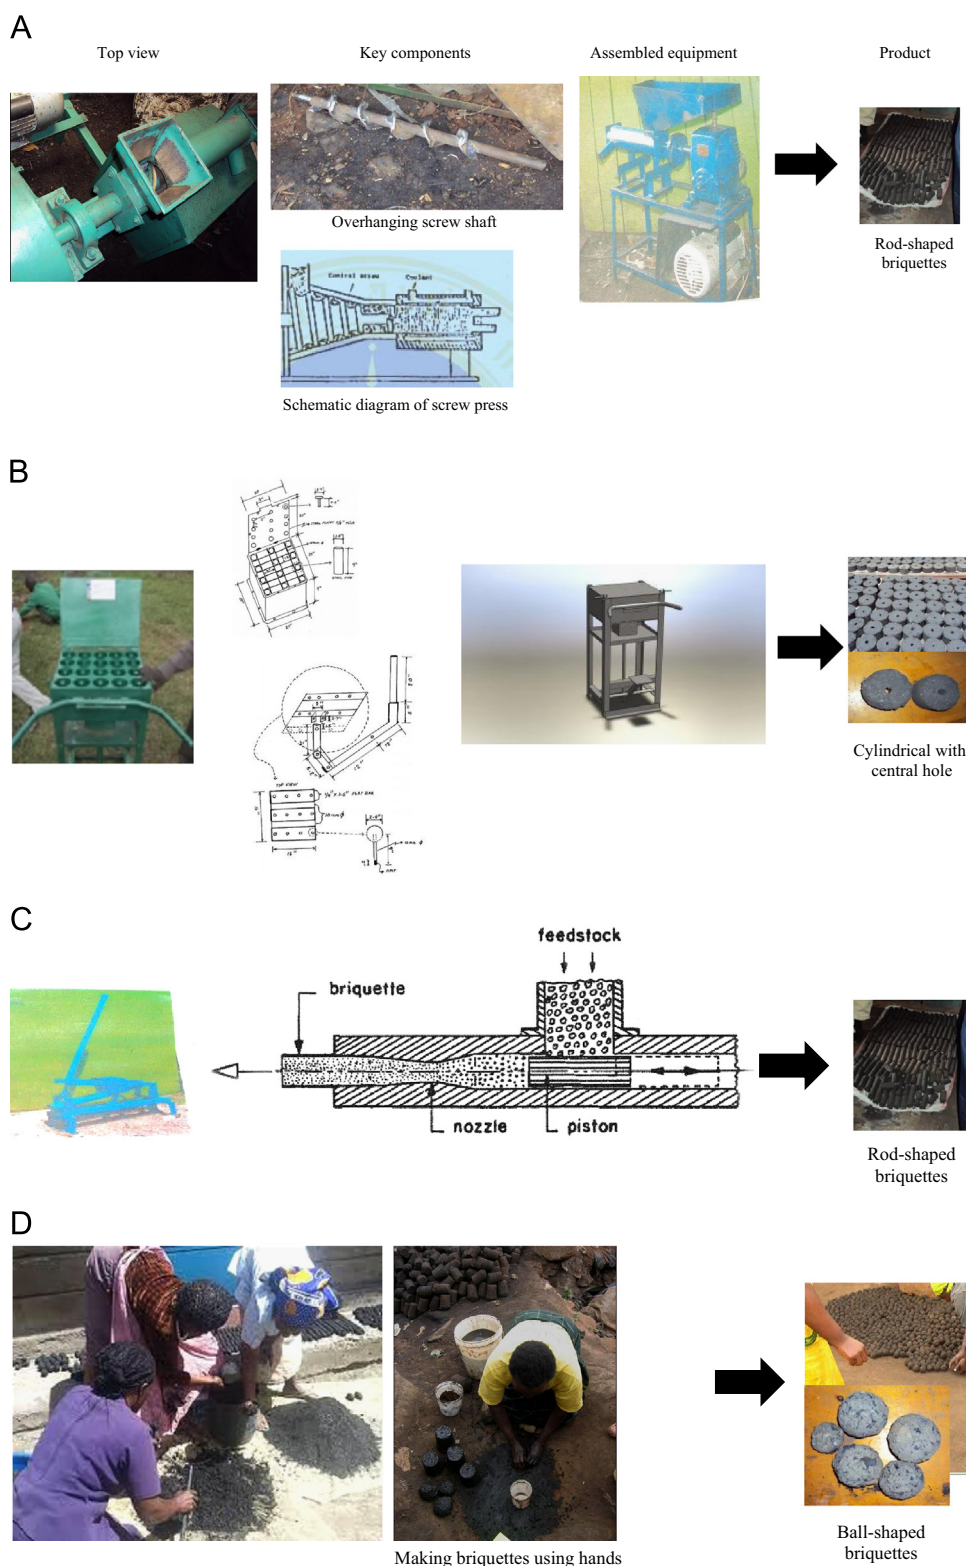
Various briquette-making processes. (A) Motorized screw press machine. (B) Mold box briquetting machine. (C) Ram/piston type machine. (D) Handmade briquettes.
